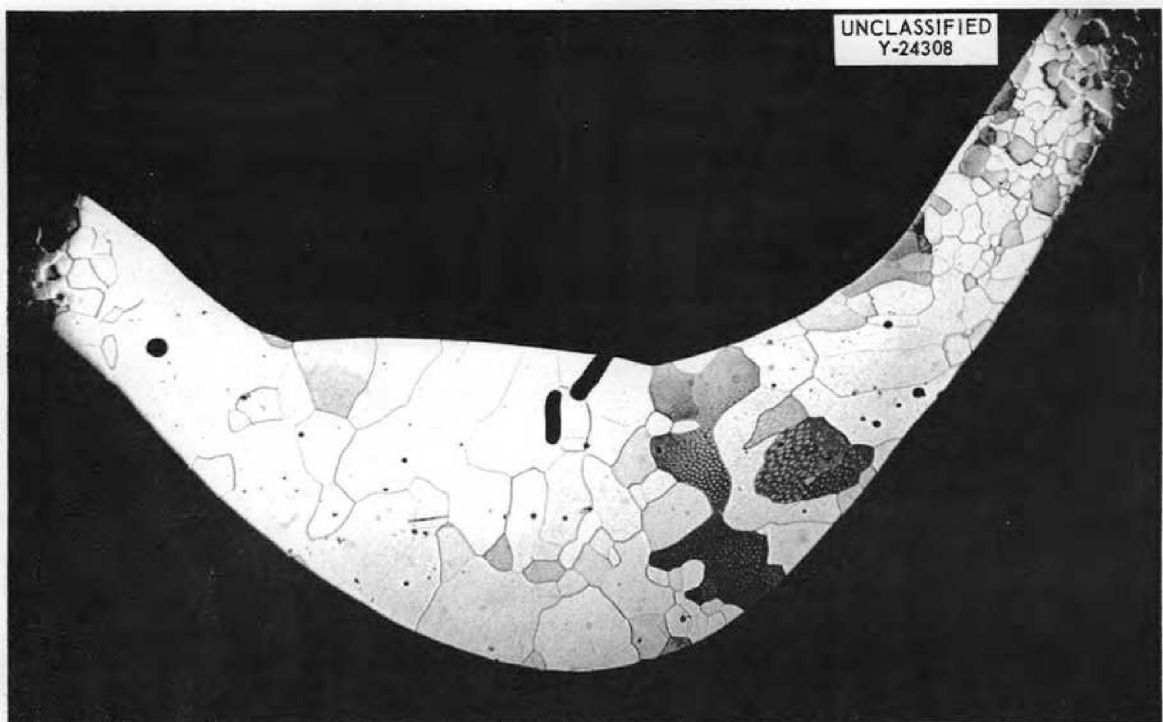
Cross Section of Niobium Saddle Weld Made with Niobium Filler Wire. Weld made at ORNL by using inert-arc method. 22X.
